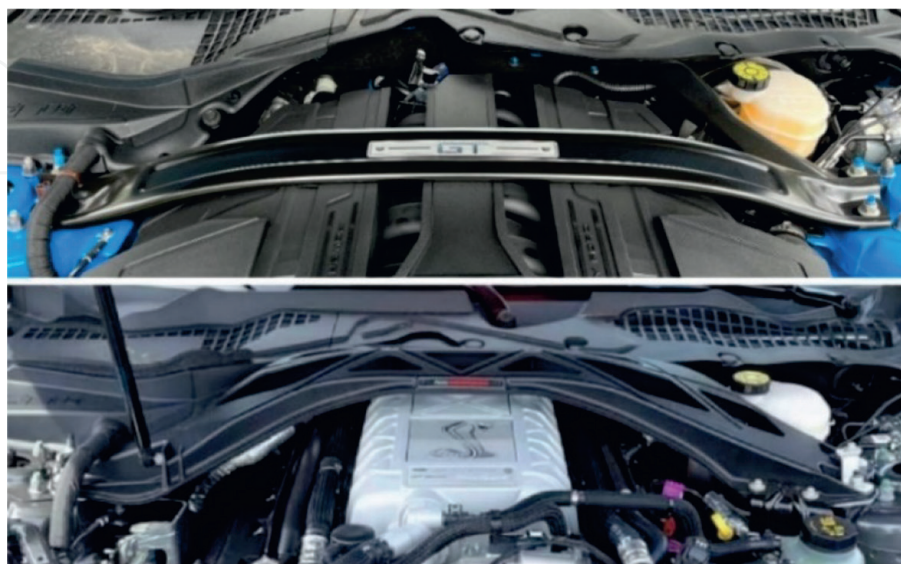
Evolution of ford mustang GT strut tower mount: (top) steel stamping and aluminum extrusion strut tower mount and (bottom) HPDC magnesium strut tower brace manufactured by Meridian lightweight technologies.
